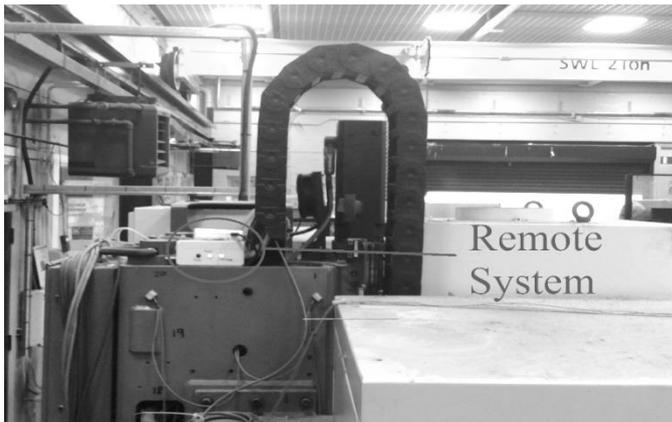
Picture of the Remote System at the Back of The CNC Machine
